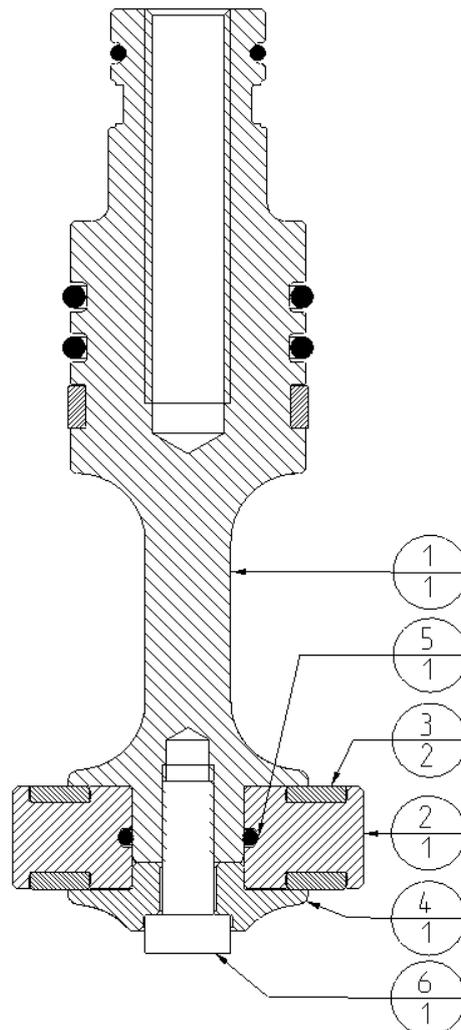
Spool assembly CO 3 way pneumatic valve size 1" ½: aluminum machining
